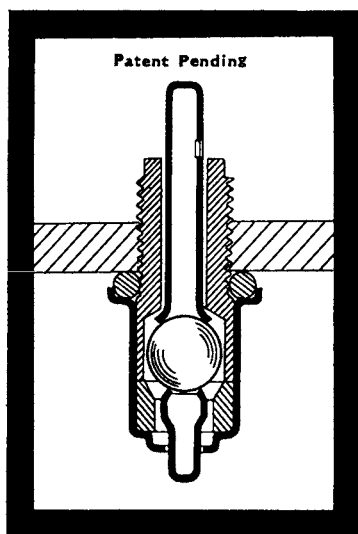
Exploded diagram of an 'Aquisip' nipple valve drinker for poultry.
